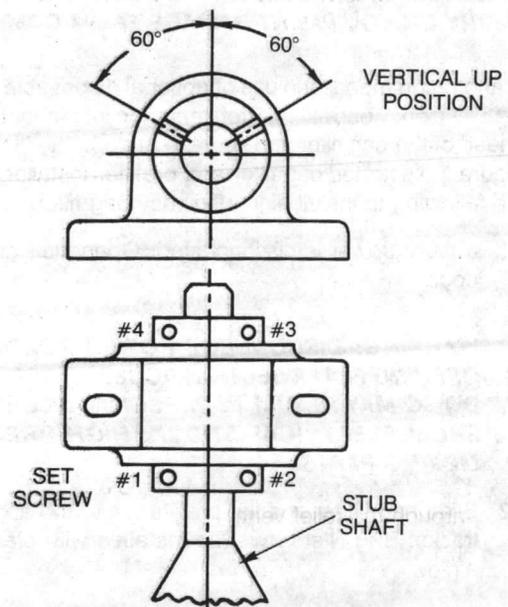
Instruction Sketch for Pillow Block Bearing with Double Lock Setscrew
